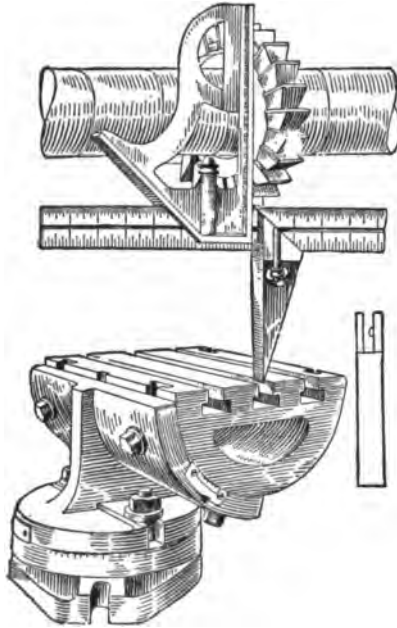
SETTING TOOL FOR USE WITH THE MILLING VISE
